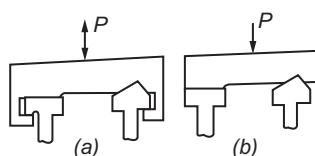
C Sliding guides. (a) closed type; (b) open type.
